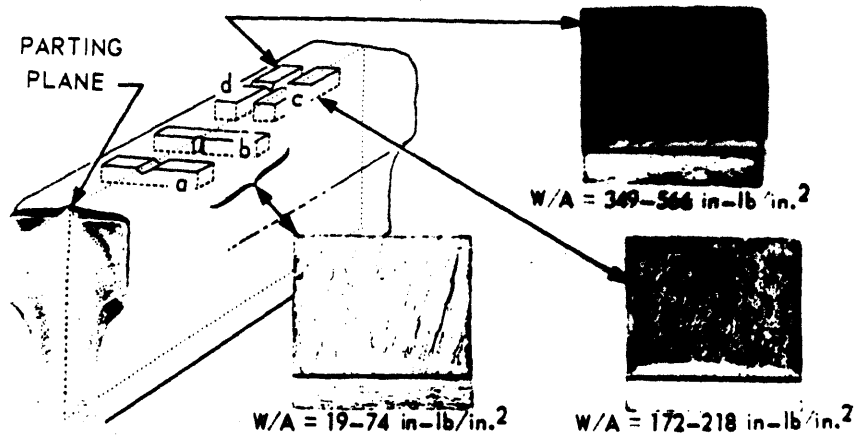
Location and fracture appearance of precracked Charpy V-notch specimens.
